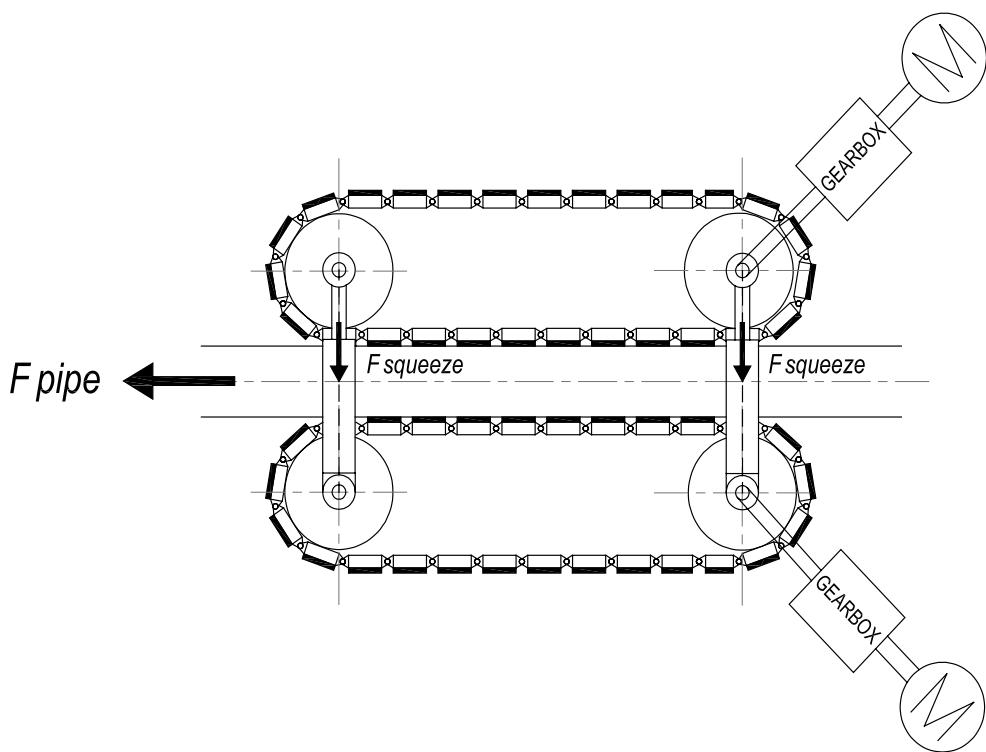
A Drive principle for a pipe or flexible lay tensioner
